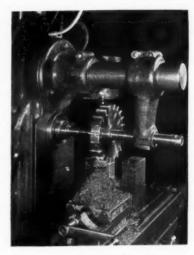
From a general point of view, it is quite probable that enough material is reduced to chips in one year by milling to build a cruiser. This vast amount of waste can be substantially reduced by making more use of specialized band sawing machines.
